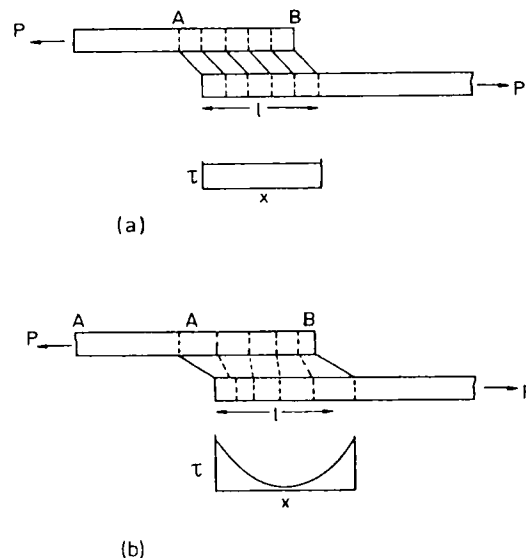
Exaggerated deformations in loaded single lap joint:
